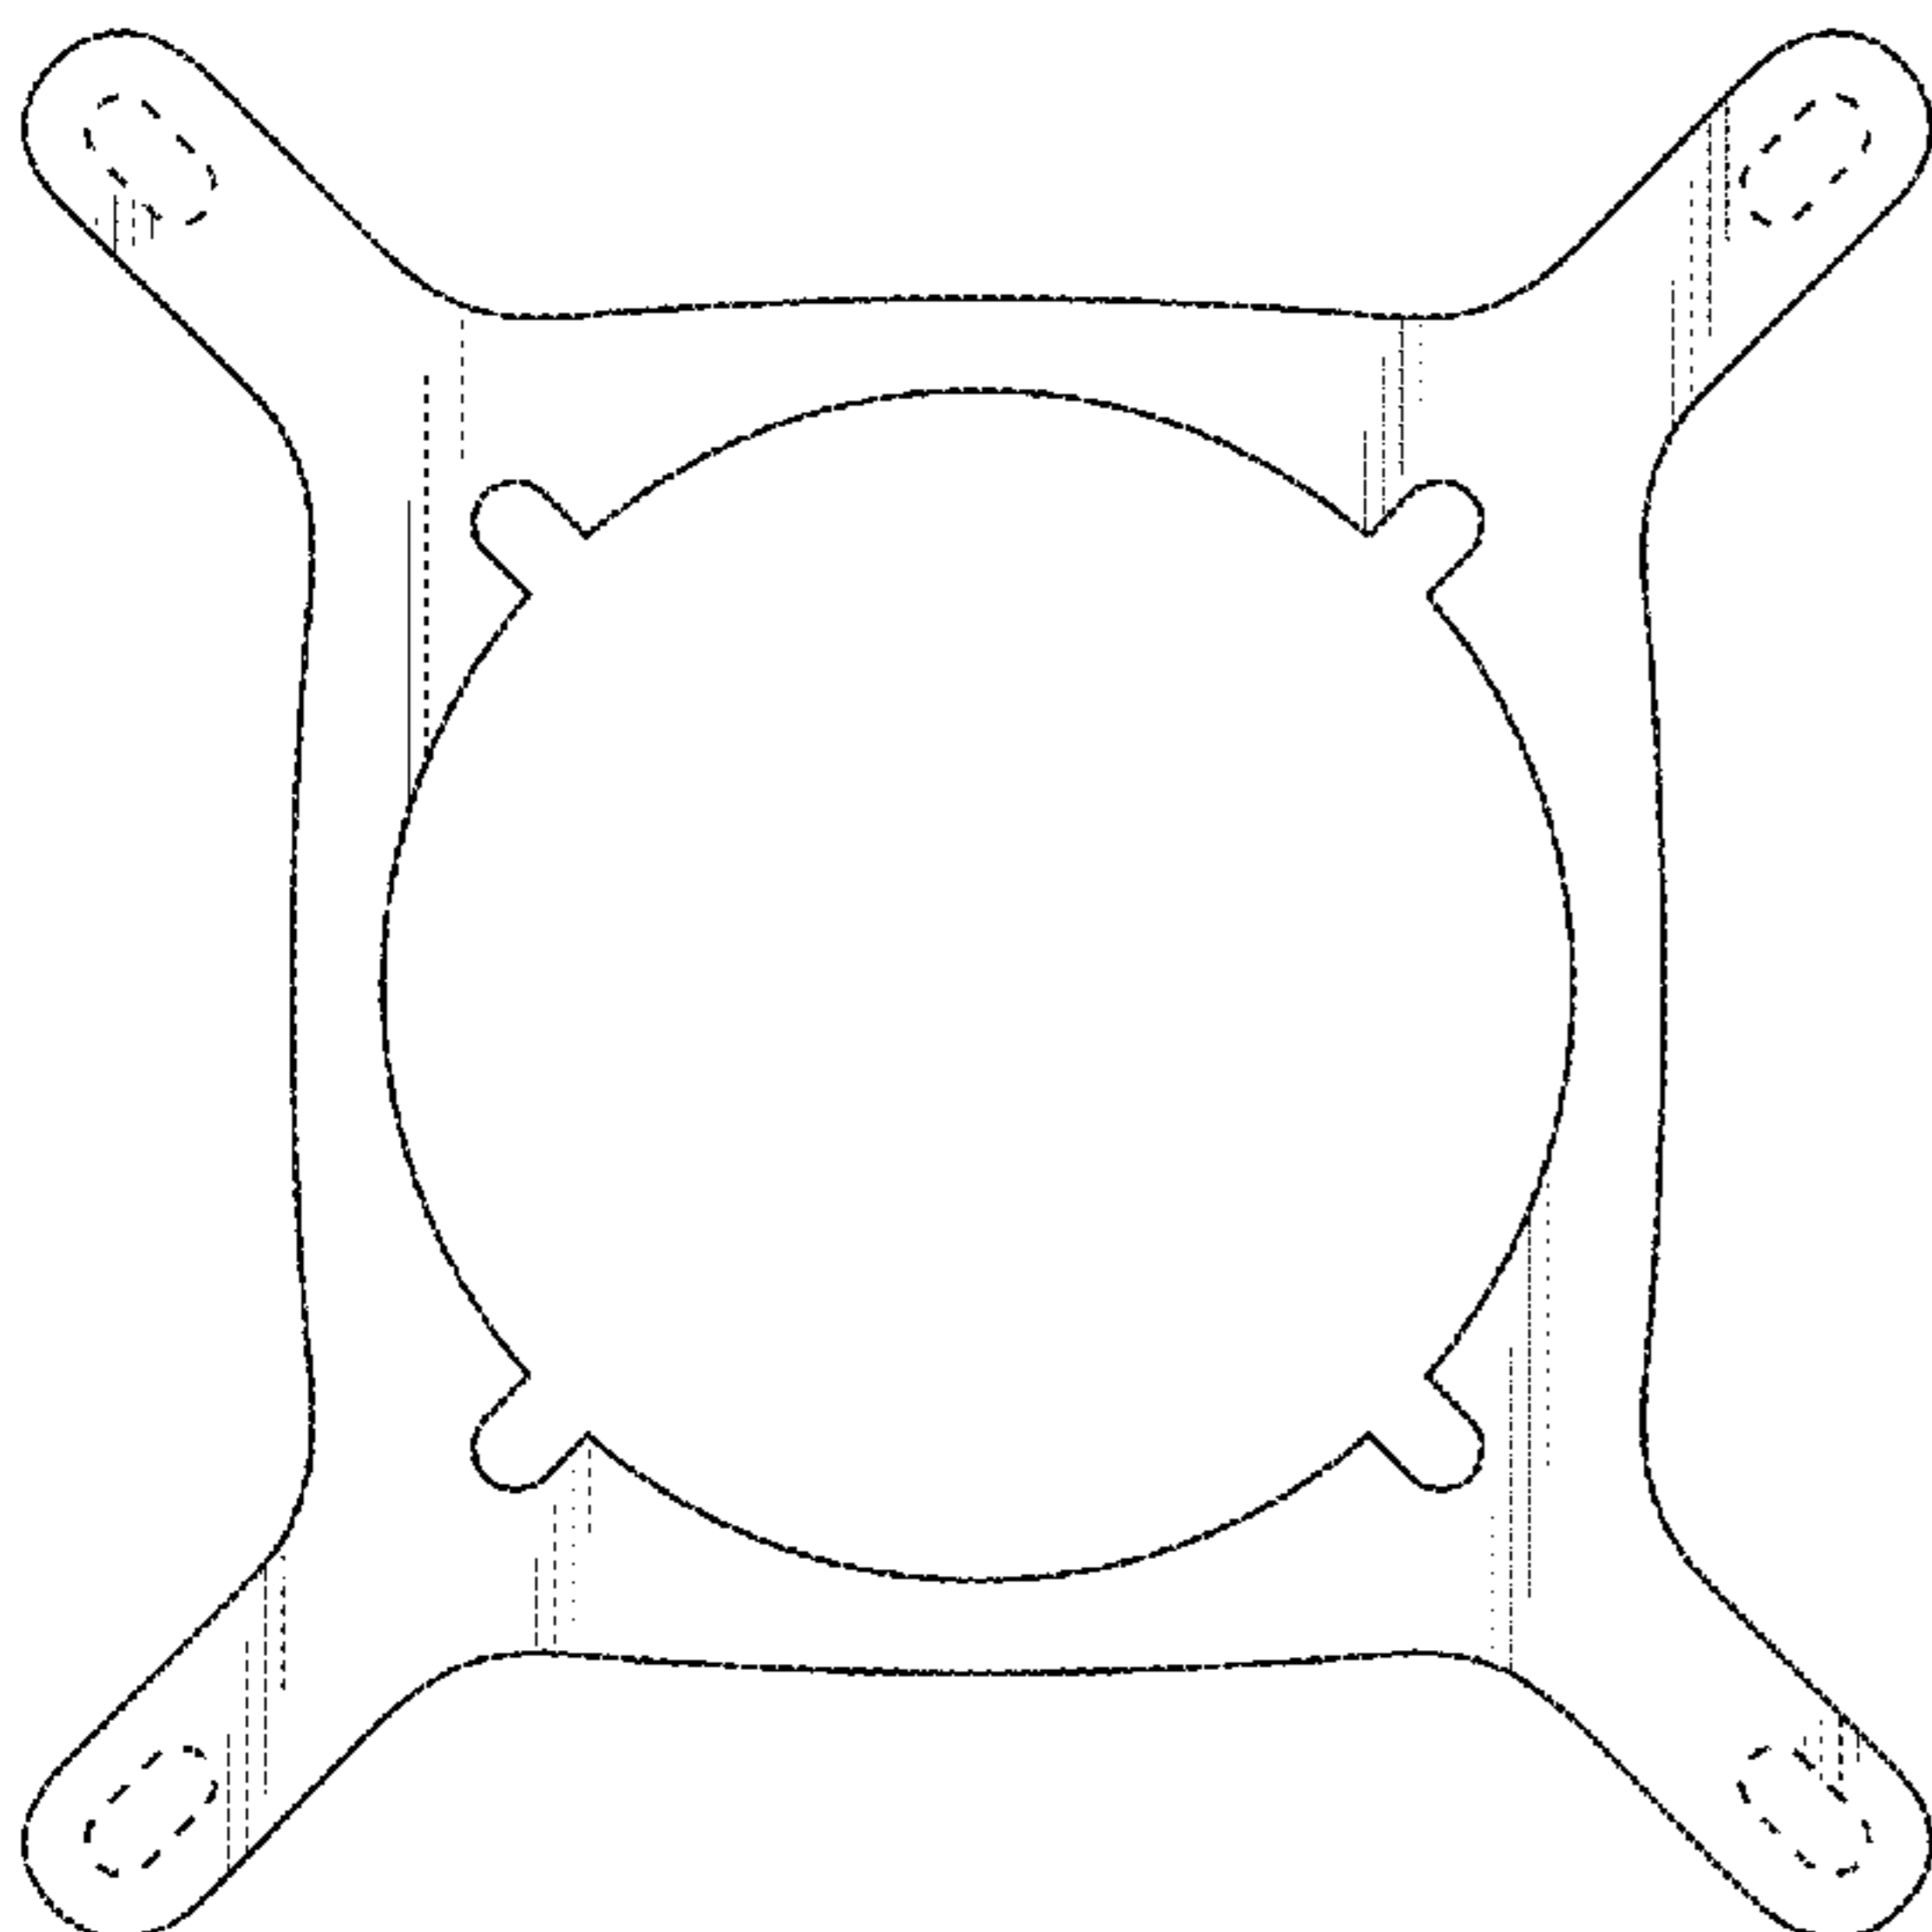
is a top front perspective view of a retainer plate for a pump showing my new design, with the bottom rear perspective view being identical thereto.
